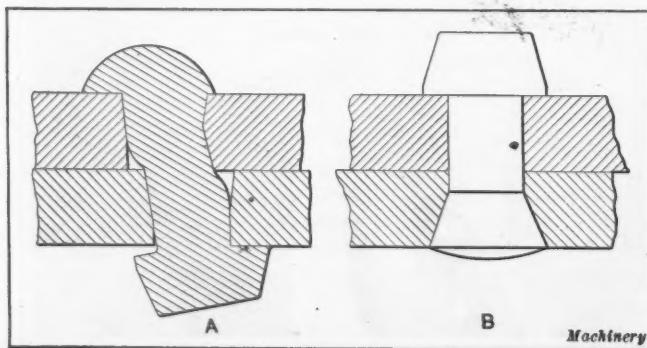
(A) Rivet driven into Offset Rivet Hole. (B) "Flush" Rivet having Crowned or Slightly Rounded Head to avoid chipping off Excess Material
